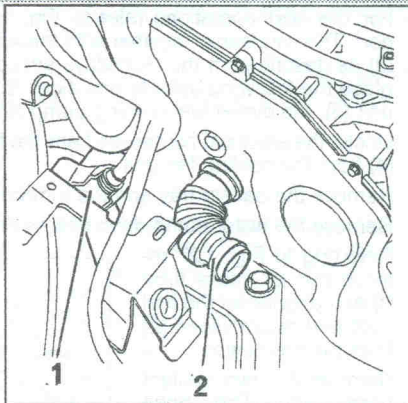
Removal of the connector cover and connector (1) and the air hose (2).
